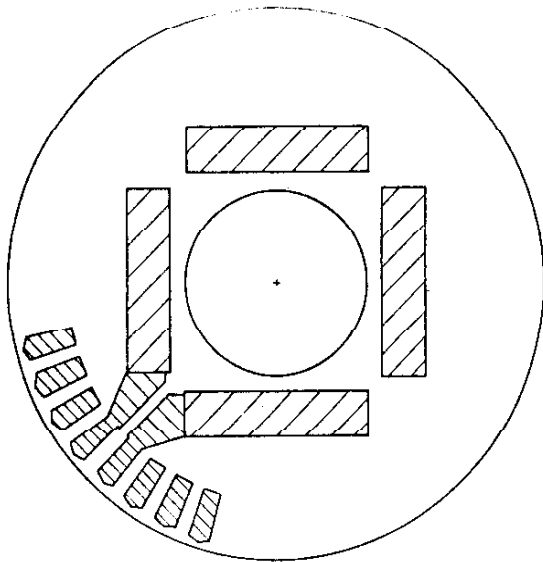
Schematic of magnet arrangement in rotor of machine.
